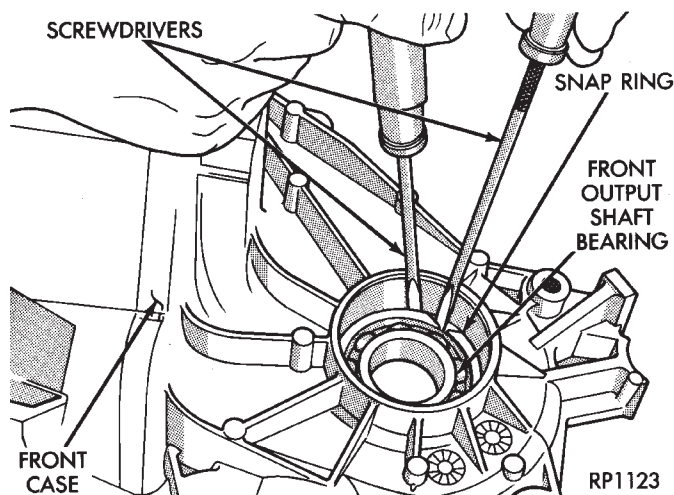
Front Shaft Front Bearing Retaining Ring Removal
